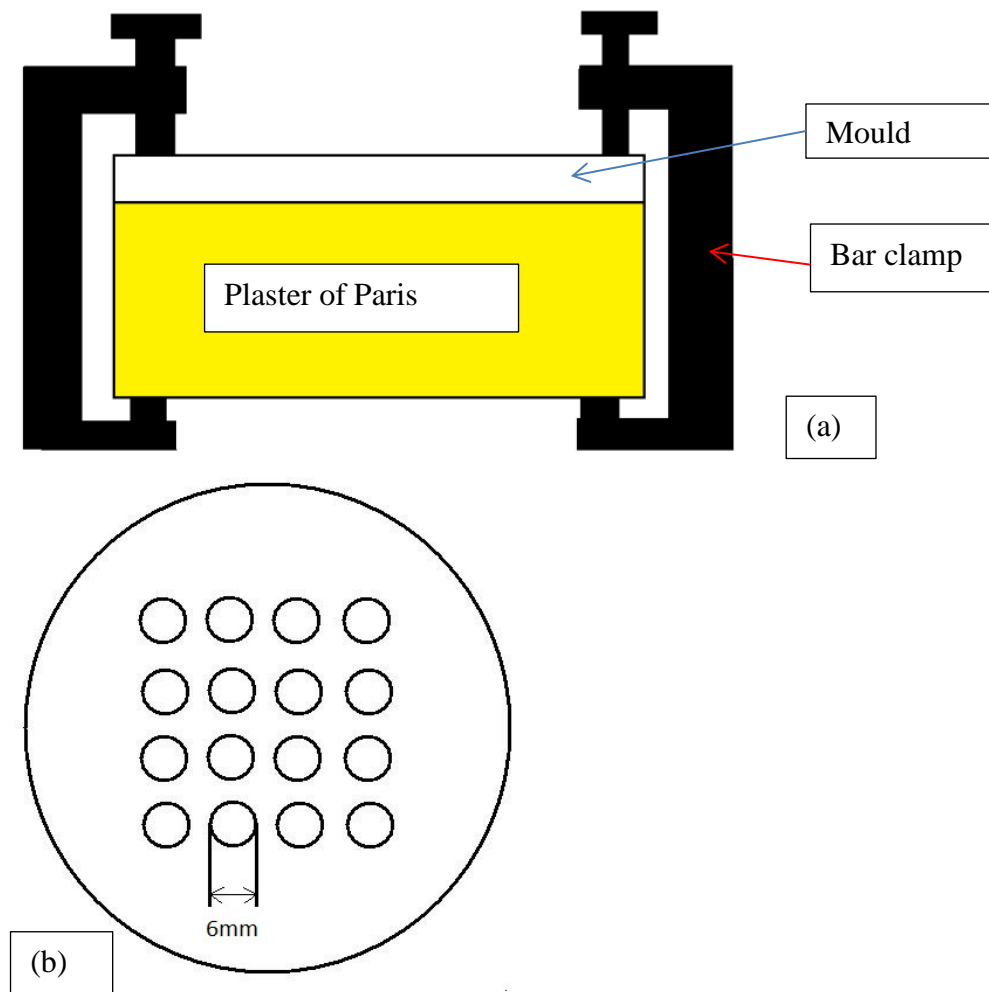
Arrangement (a) and mould surface (b) for slip casting
